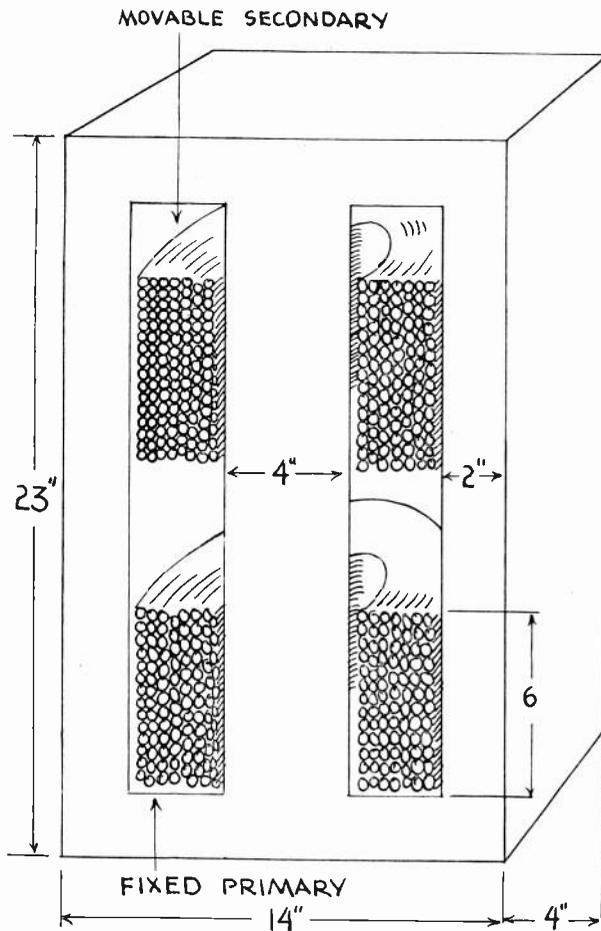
D. A 10 Kv-a. welding transformer designed for operation on a 220 volt line.
